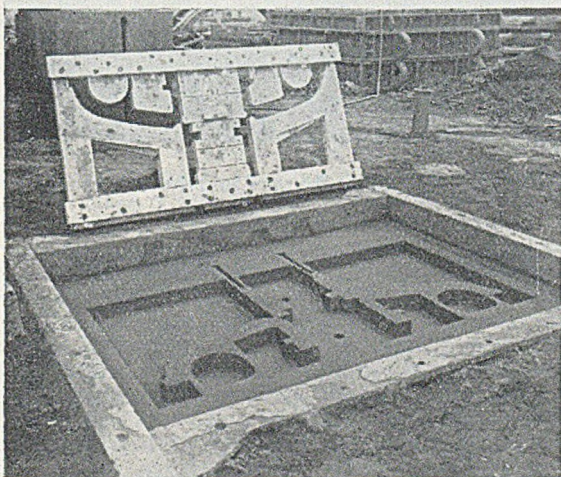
Core-assembly Layout for the Exhaust Casing; No Pattern was required.
